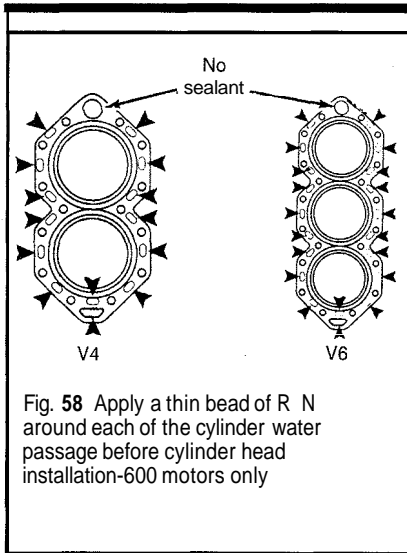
Apply a thin bead of R N around each of the cylinder water passage before cylinder head installation-600 motors only
